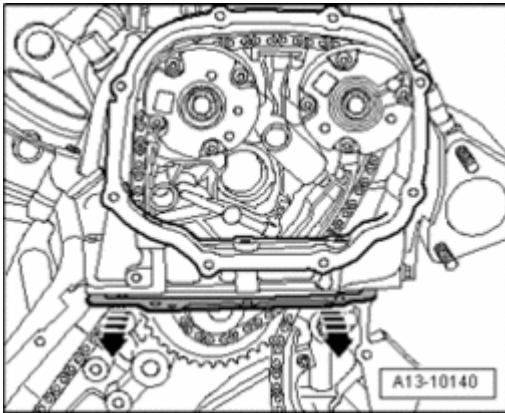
Bending Ends Of Cylinder Head Gaskets Very Slightly Downward Until Upper Sealing Surface Of Gasket And Cylinder Head Can Be Cleaned
